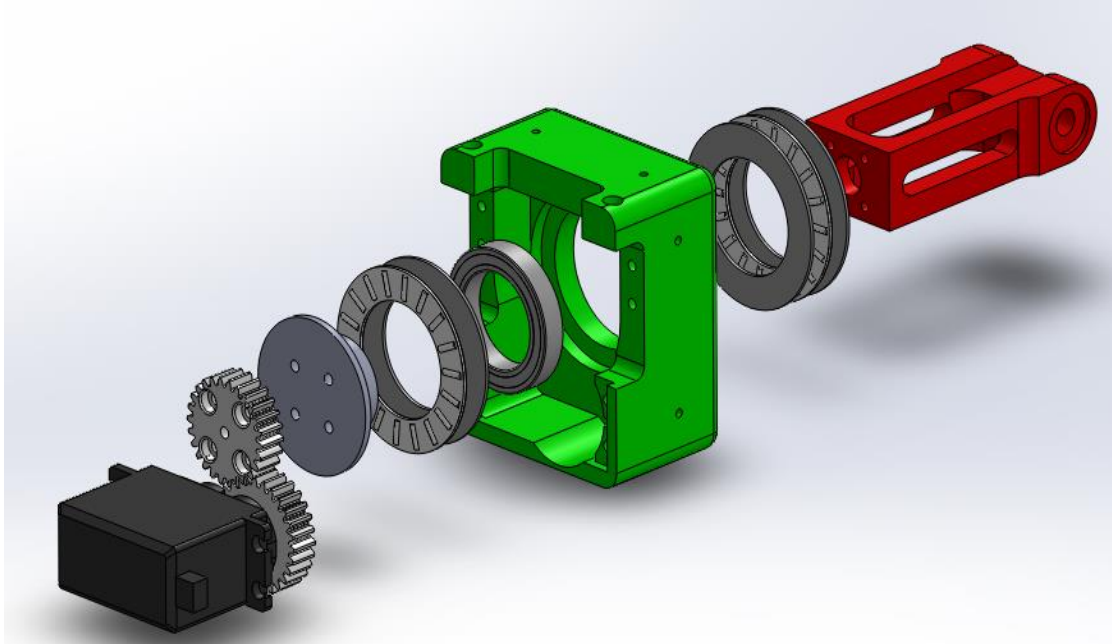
The assembly of the elbow rotation mechanism is comprised of the following components (from left to right): servo with two gear train, elbow hub, needle thrust bearing, radial bearing, elbow cap, needle thrust bearing, elbow mounting bracket.
